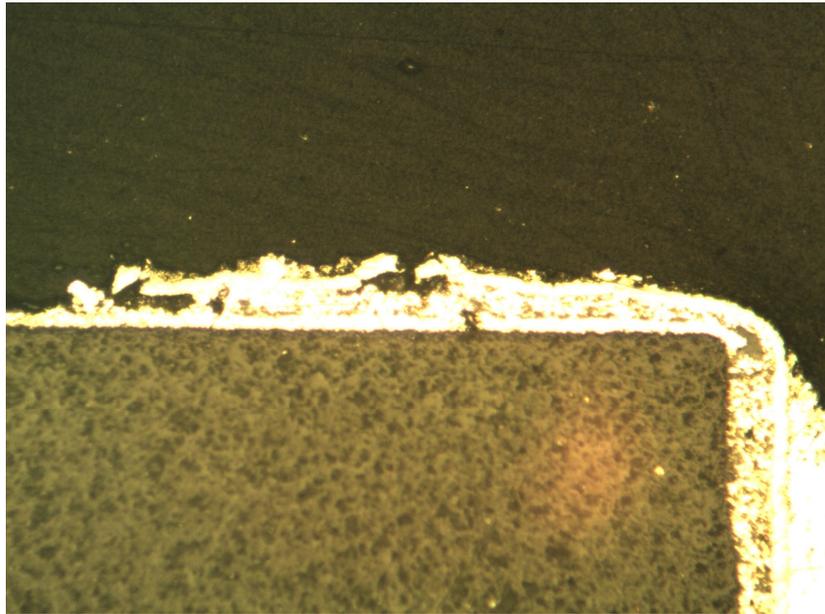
Hot Melt 1 on FR4 Test Board 2512 Resistor Image
